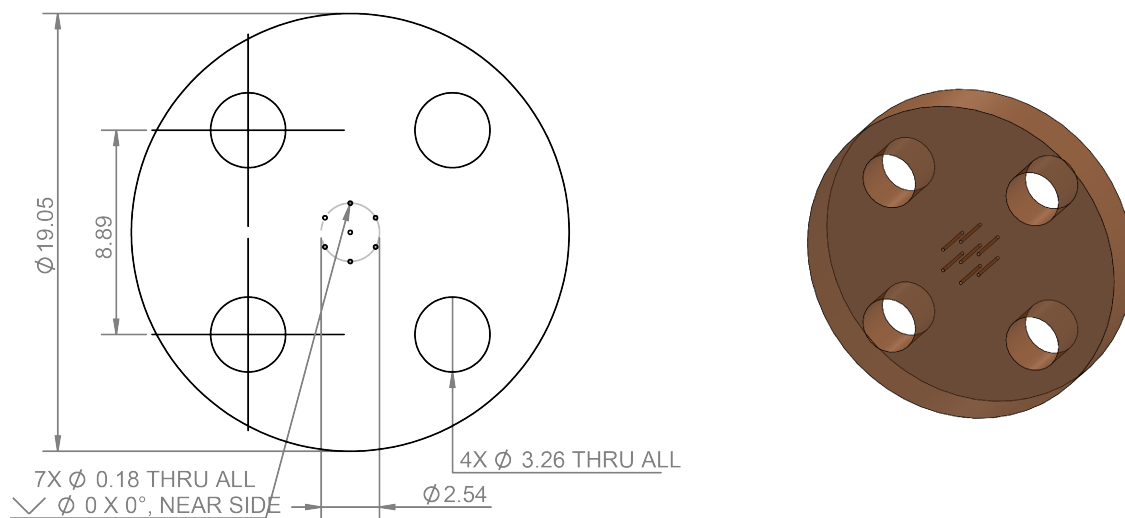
Drawings for injector for reactor. Dimensions are in mm. The injector mounts to the reactor top cap (Figure S9) using four nylon screws and the O-ring (1 mm thick, 4 mm ID, BUNA material, P/N 9262K102 from McMaster-Carr). The cluster of 7 holes is not drilled all the way through. Instead, it is finalized with micro-drill manually resulting in $\sim 0.25 \pm 0.05$ mm hole. The cluster of seven holes provides a convenient means of spray injection. It is robust, because even if partial clogging of one or more injector holes occurs the device can continue function without disruption (arguably as somewhat reduced performance). Moreover, this part is disposal, and when the reactor is being cleaned (from residual Rh deposits), a new spray injector is installed. This component is made of polysulfone.
